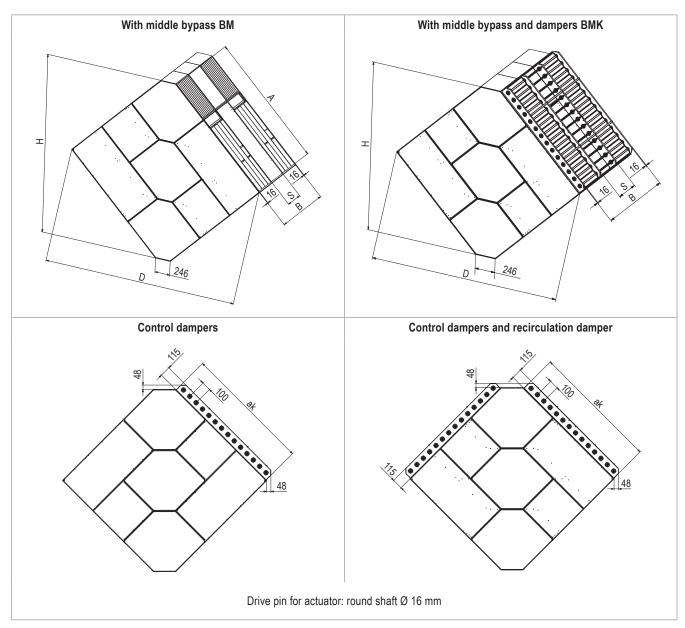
Dimension sheet for Gotthard plate heat exchangers of construction type C (dimensions in mm)
